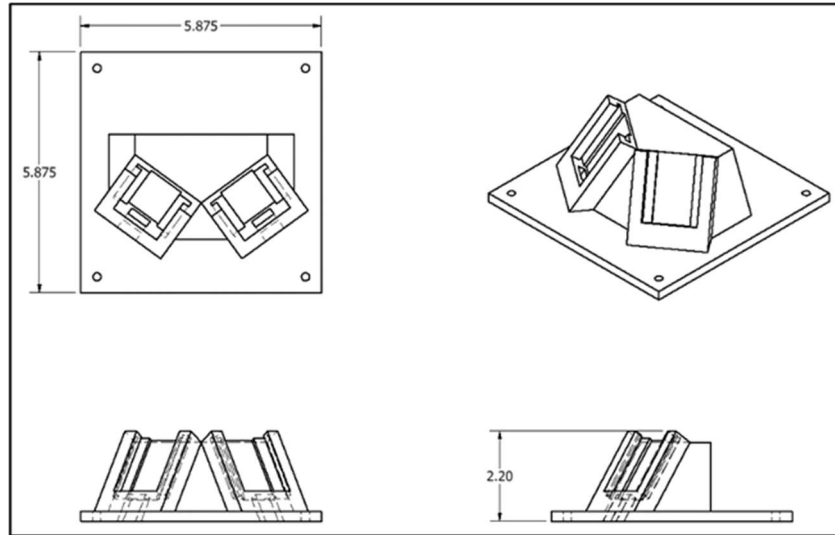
Mechanical design and dimensions of the camera mount/payload cap.
